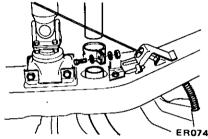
Disconnecting exhaust front and center tube assembly
